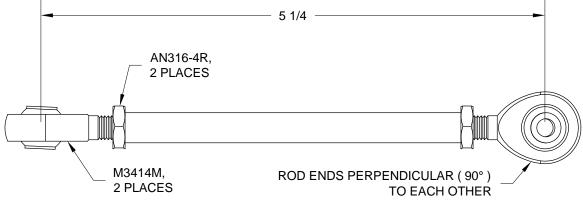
ROLL SERVO PUSHROD ASSEMBLY
